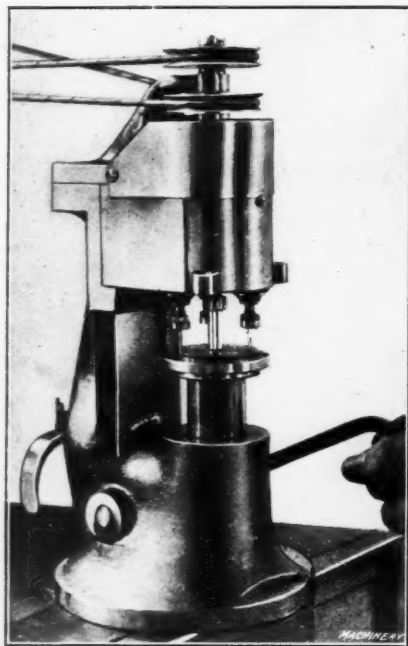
Three-spindle Drill Press for Drilling Dial Foot Holes in Watch Plates
